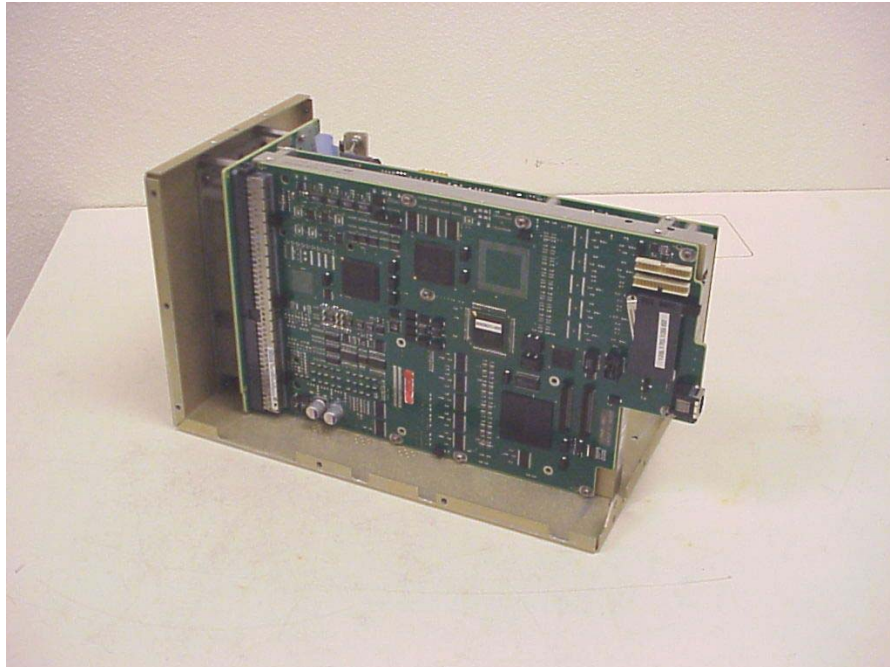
Left Side View of 6 MCU Unit, Covers Removed
